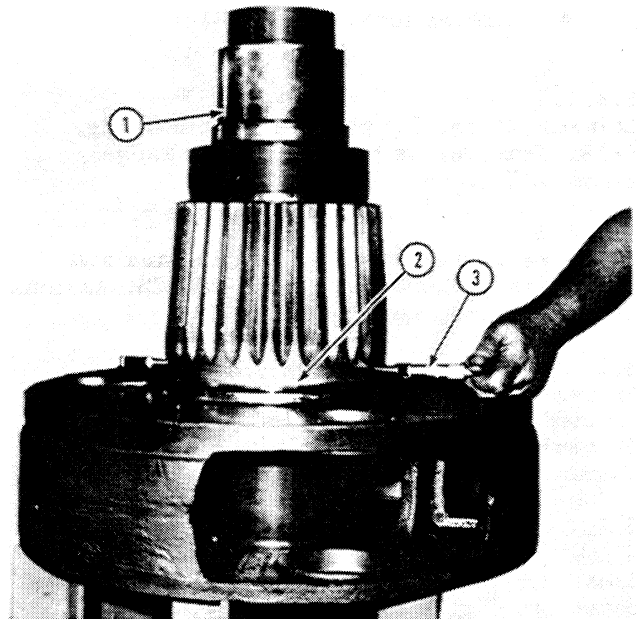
MEASURING BORES FOR PLANET GEAR PINS
